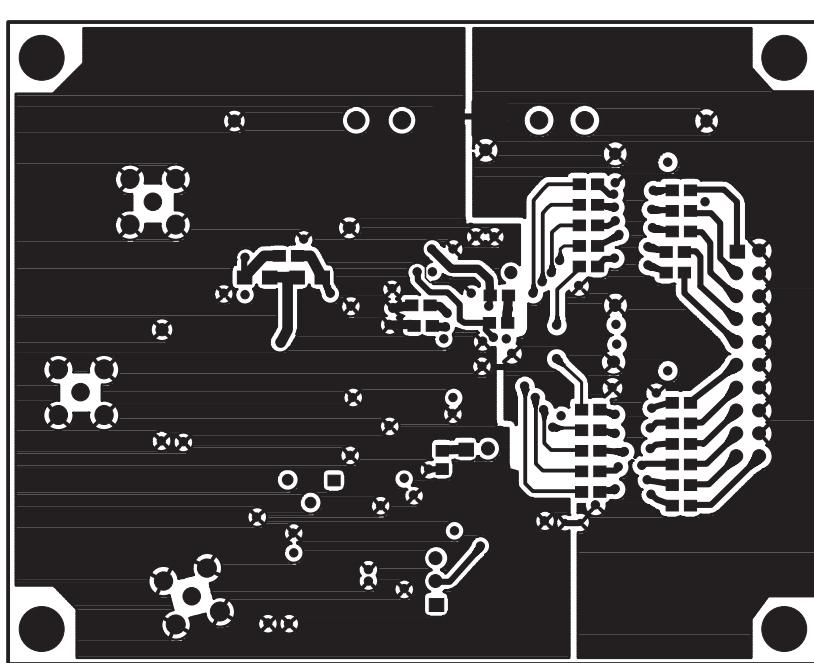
MAX1425 EV Kit PC Board Layout—Layer 4
